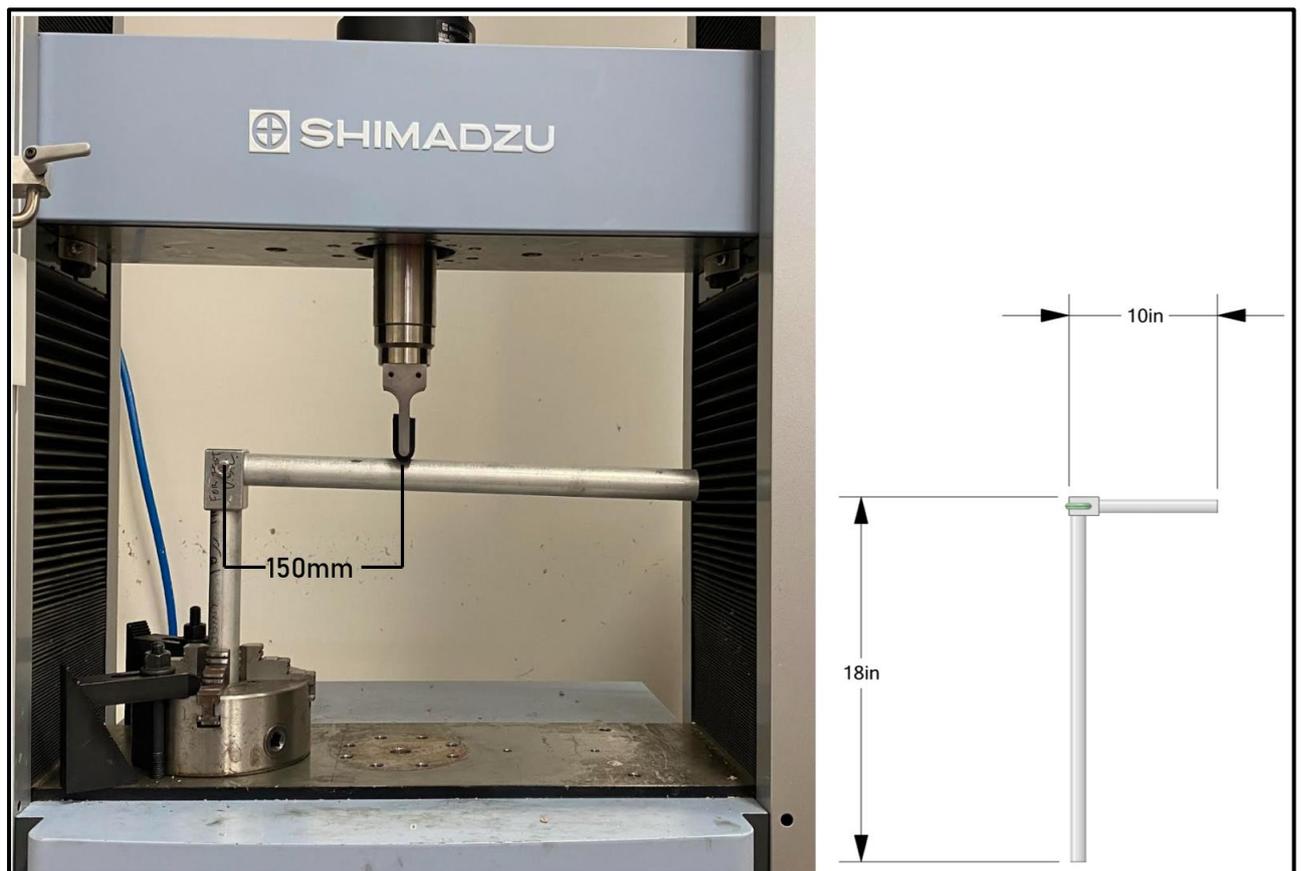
Corner Piece Compression test setup for A5 Corner piece, with dimensions (Block corner and diameter dimensions included within Part 7 – Detailed Model of Designs).
